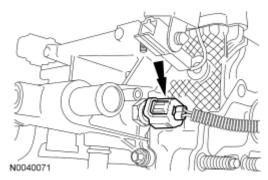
Locating Oil Pressure Sender Electrical Connector Courtesy of FORD MOTOR CO.
